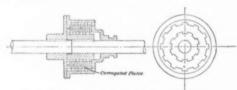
PROF. HELE-SHAW'S CLUTCH
